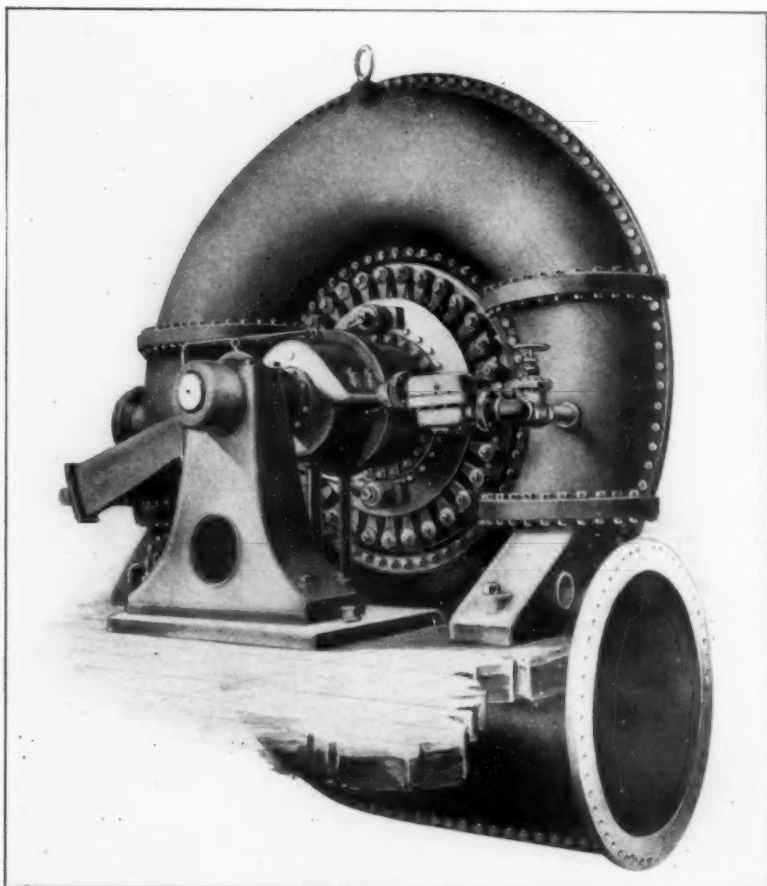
SINGLE SWIVEL GATE WHEEL, SHOWING GATE WORK, DEVELOPING 9000 H.P. UNDER 270 FEET HEAD.
